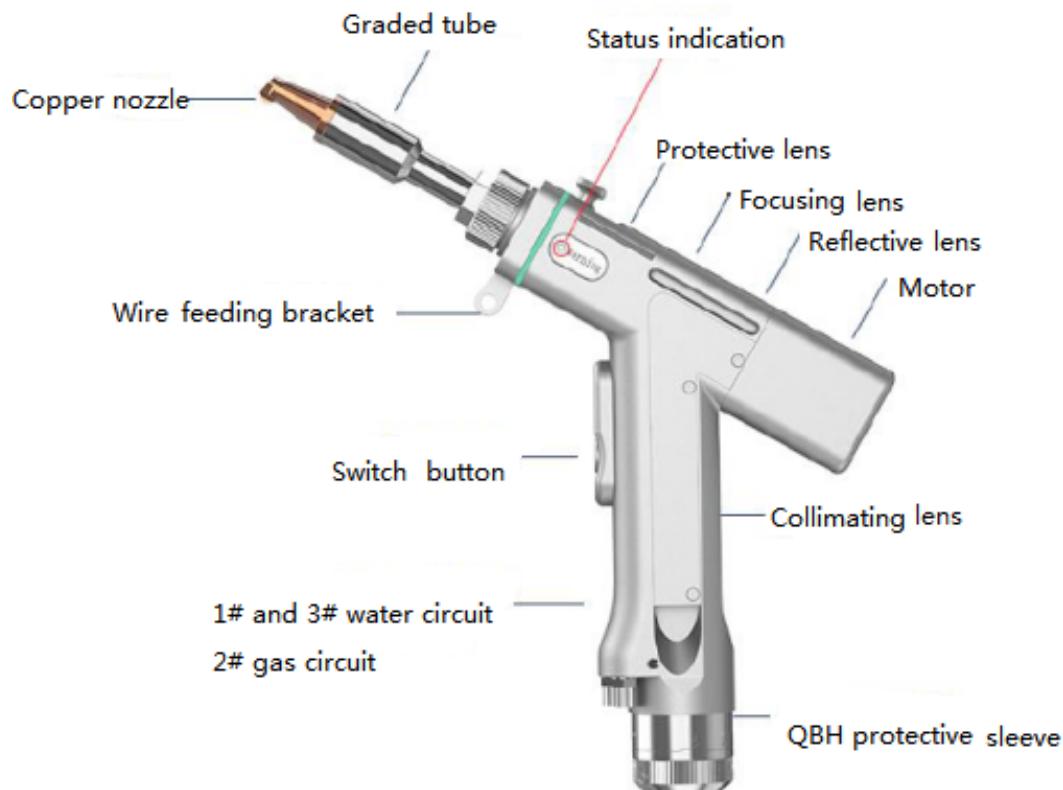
Schematic of hand-held laser welding torch
